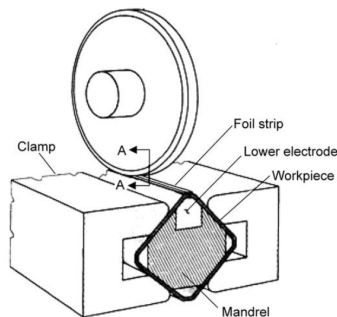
RSEW machine with one moving wheel and a mandrel holding the second electrode [23].
